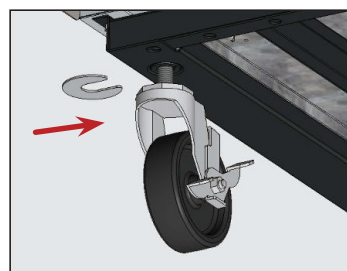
Insert the castor shim(s). be sure to tighten the castor stem.
